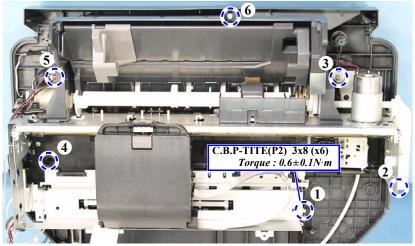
Removing the screws (Printer Mechanism Assy)
